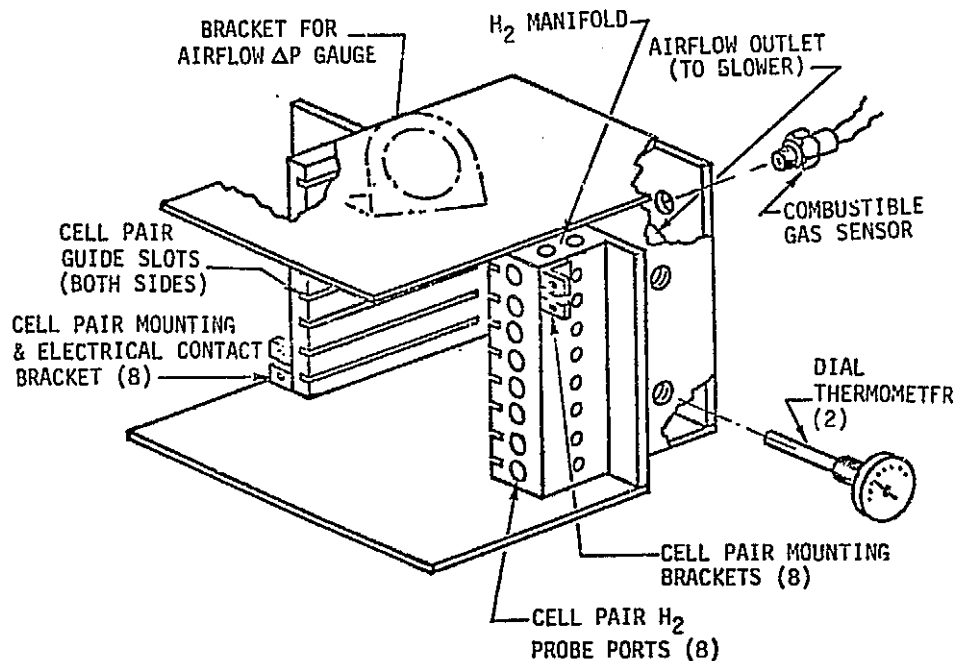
CELL PAIR RACK AND MANIFOLD HOUSING
